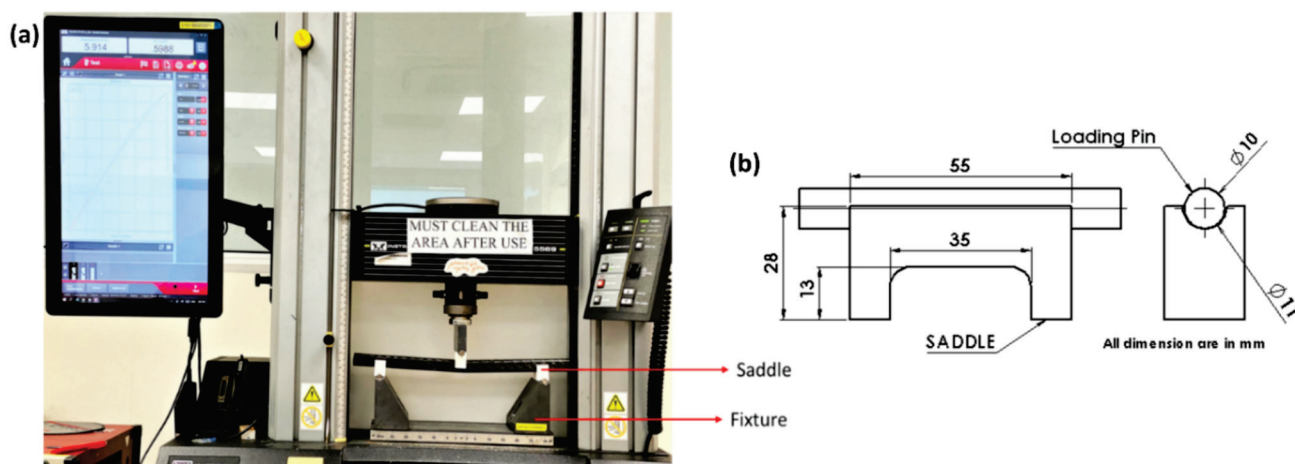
(a) Flexure experimental test set-up with saddle supports for testing tubular composites (b) dimensions of the saddle and the loading pin.
